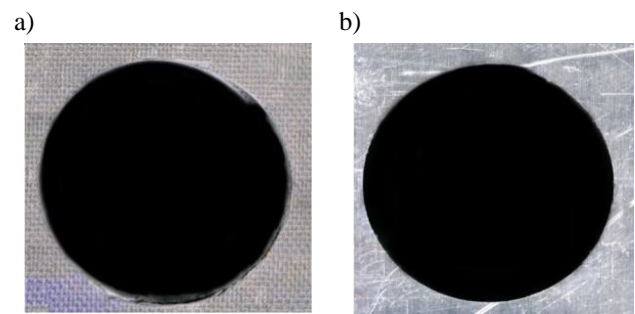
Holes after milling with the Al/CFRP strategy and the cutting speed  $v_c = 350$  m/min: a) tool entry zone, b) tool exit zone
